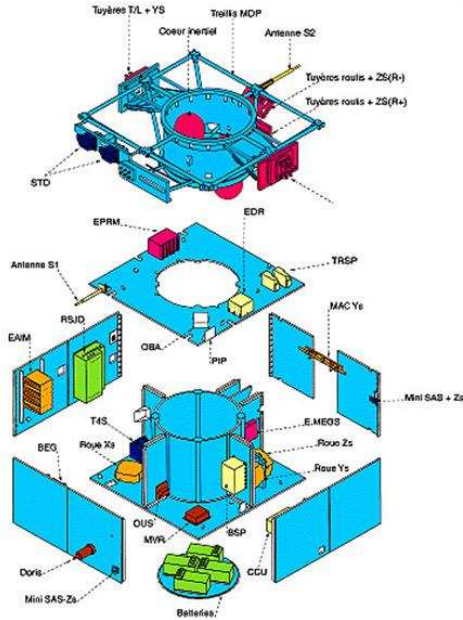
Exploded view of the optical satellite Service Module and mid-section
